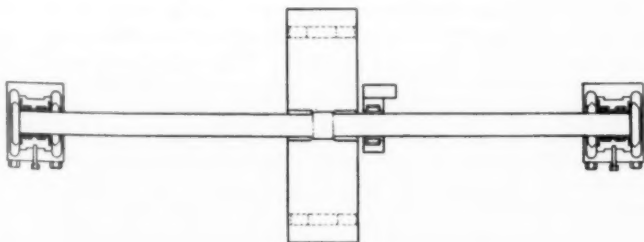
MODEL FOR SHAFT-RUBBING TESTS
